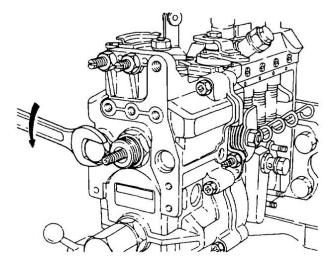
Removal of the Torque Cam Rod Adjuster Plug
